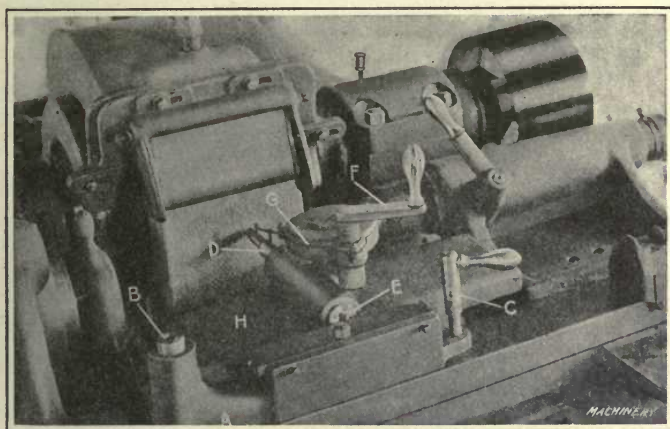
Wheel-truing Device used on Ford-Smith Grinding Machine
